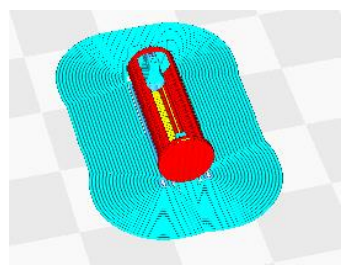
Iteration two print of Pin and Pin Body assembled with spring.
